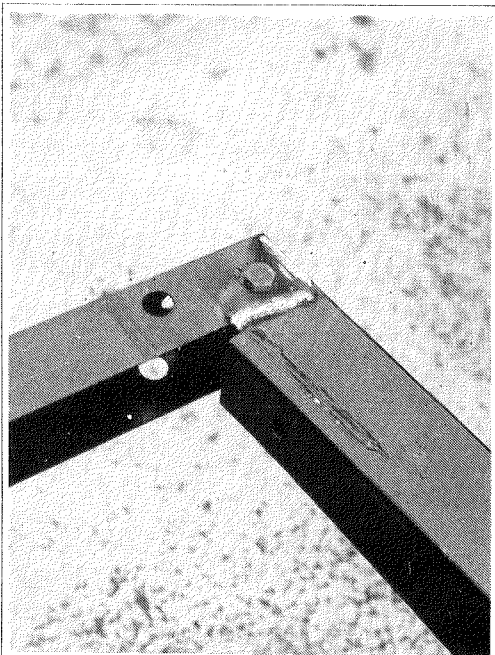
With everything now firmly in place ensure that all relevant overlaps are welded up, for example at the rear (and front) corners...
